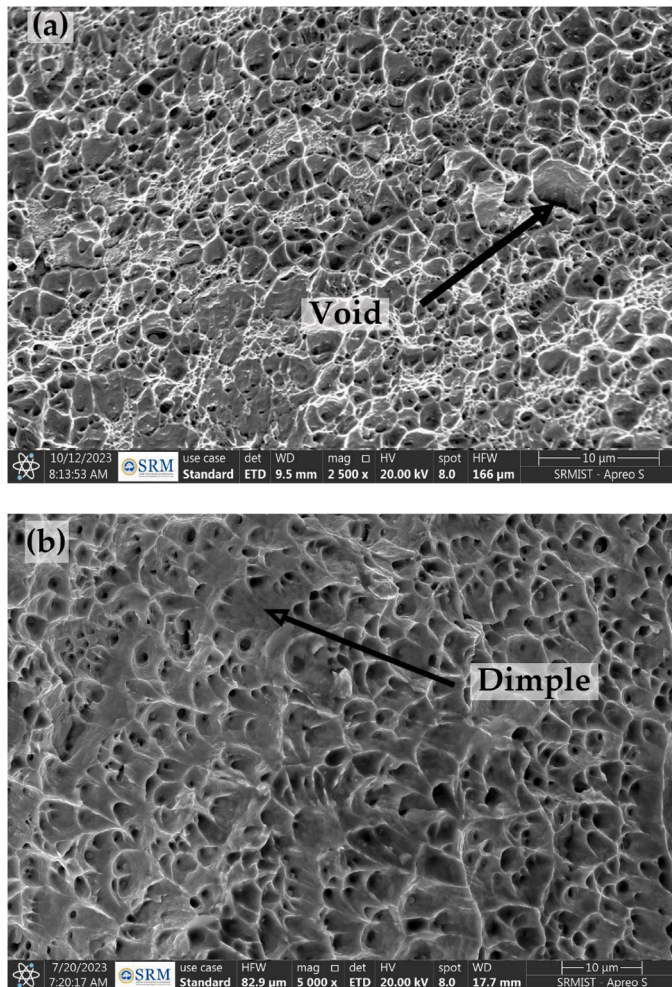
Tensile test fractured SEM image (a) E309L weld (b) E2209 weld.
